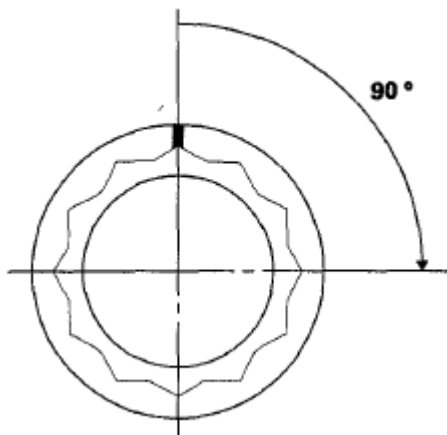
Aligning Mark Connecting Rod And Cap
